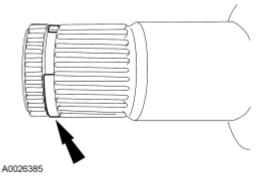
Locating Halfshaft Circlip Courtesy of FORD MOTOR CO.
